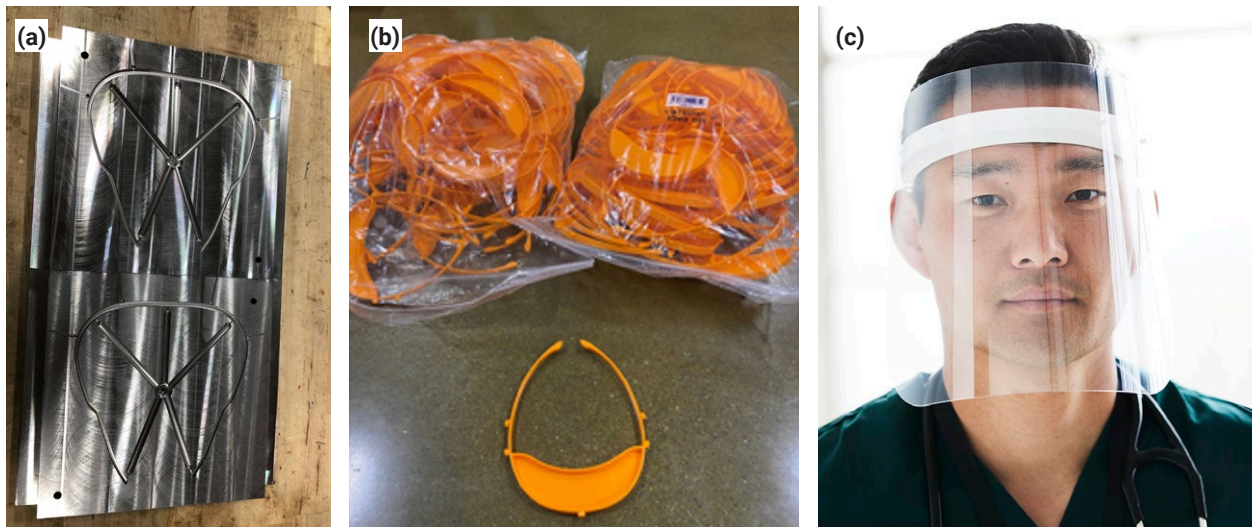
The Manufacturing team partnered with DeRoyal Industries on (a) 3D-printed tooling for (b) injection molds used to produce (c) face shields. [Courtesy Oak Ridge National Laboratory (a, b) and Getty Images (c)]
